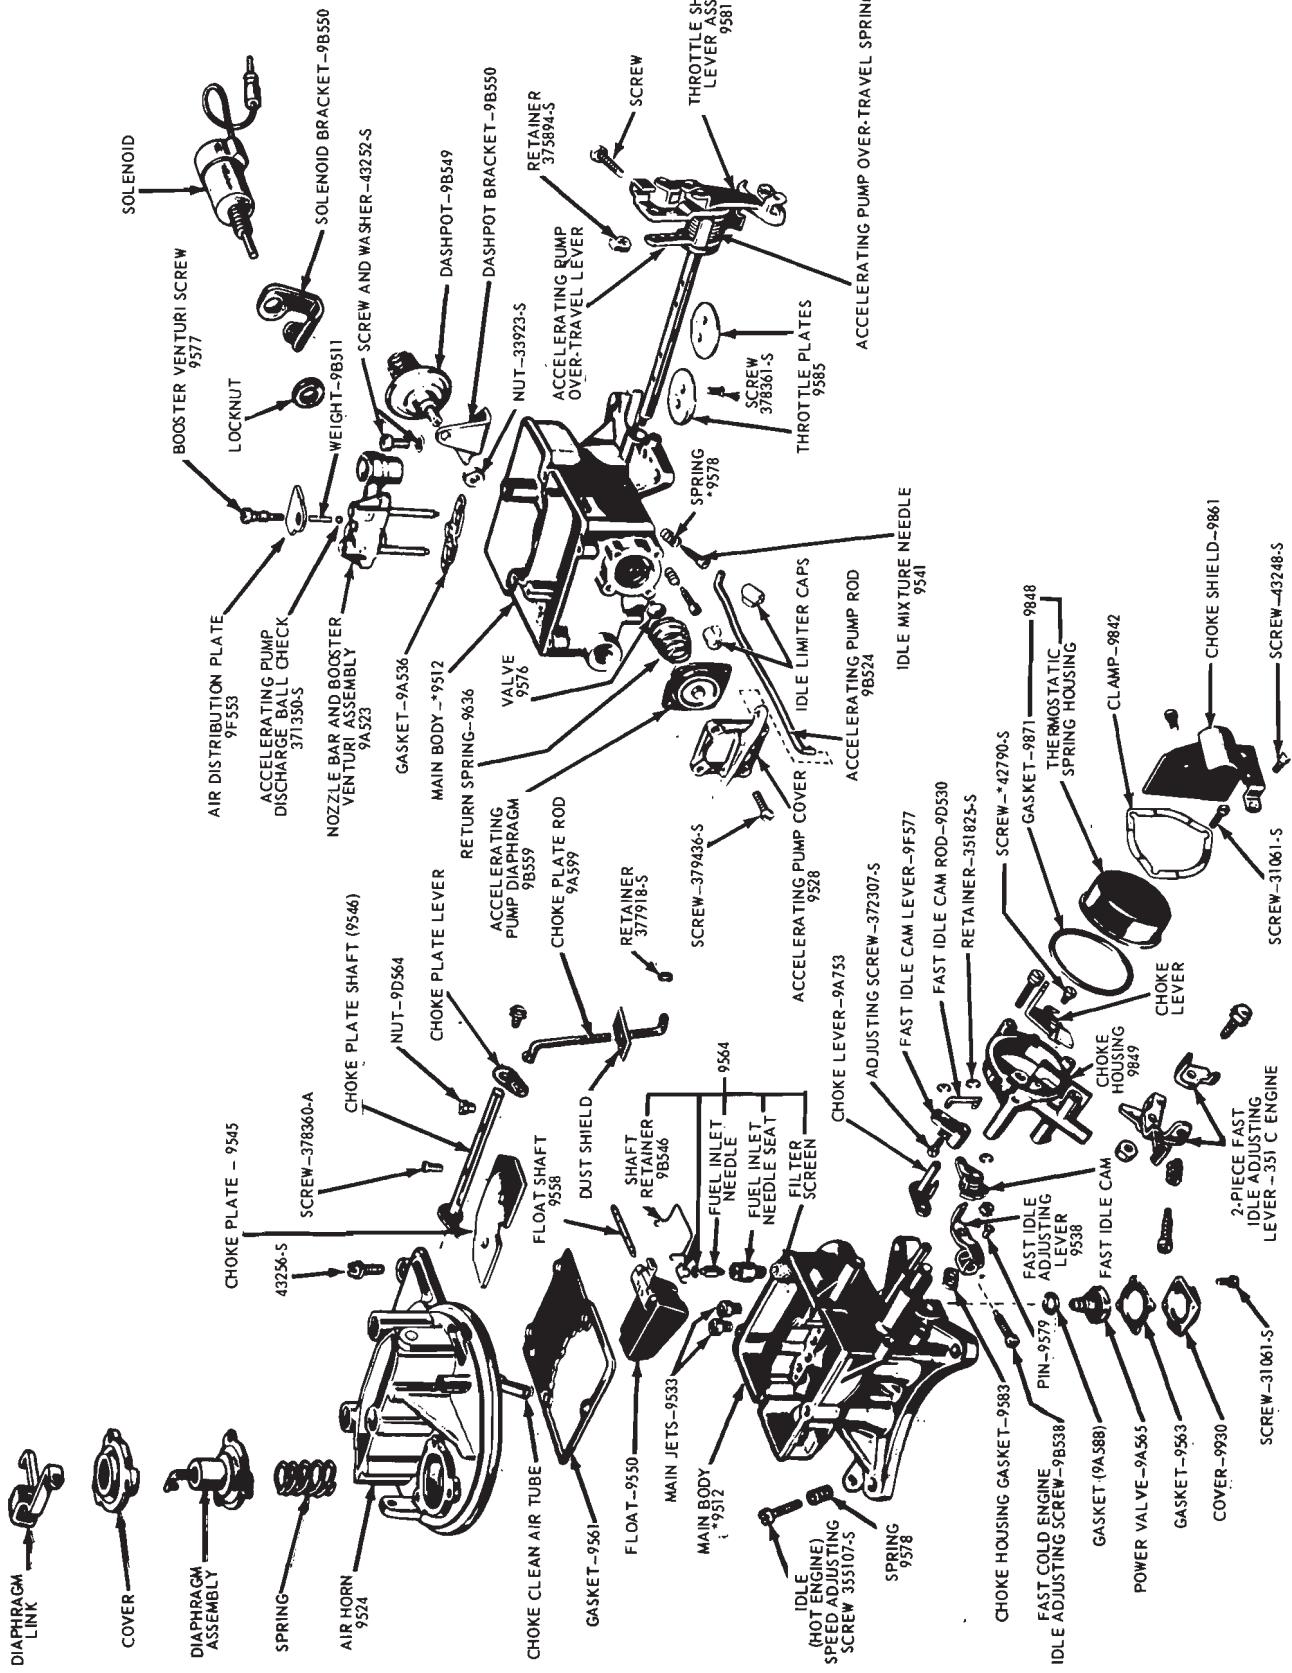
Autolite Model 2100-D 2-V Carburetor Assembly
